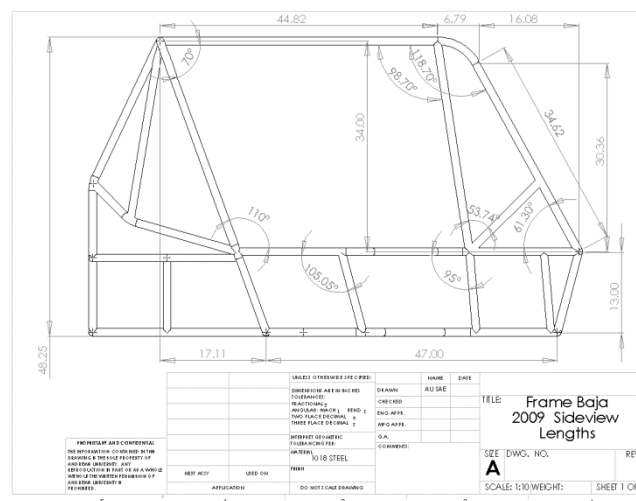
2-D drawing of the roll cage showing the correct angles between the tubes.
